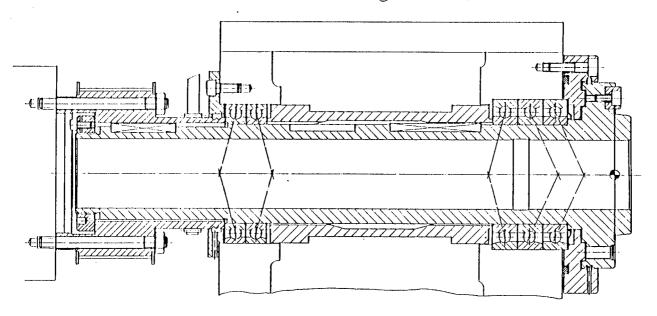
Spindle For CNC-Lathe (TNS) (Ref. 32)
